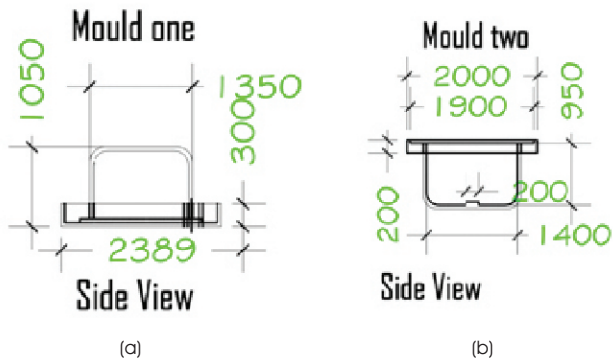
Side View Dimensions (a) Mould One, (b) Two Mould
